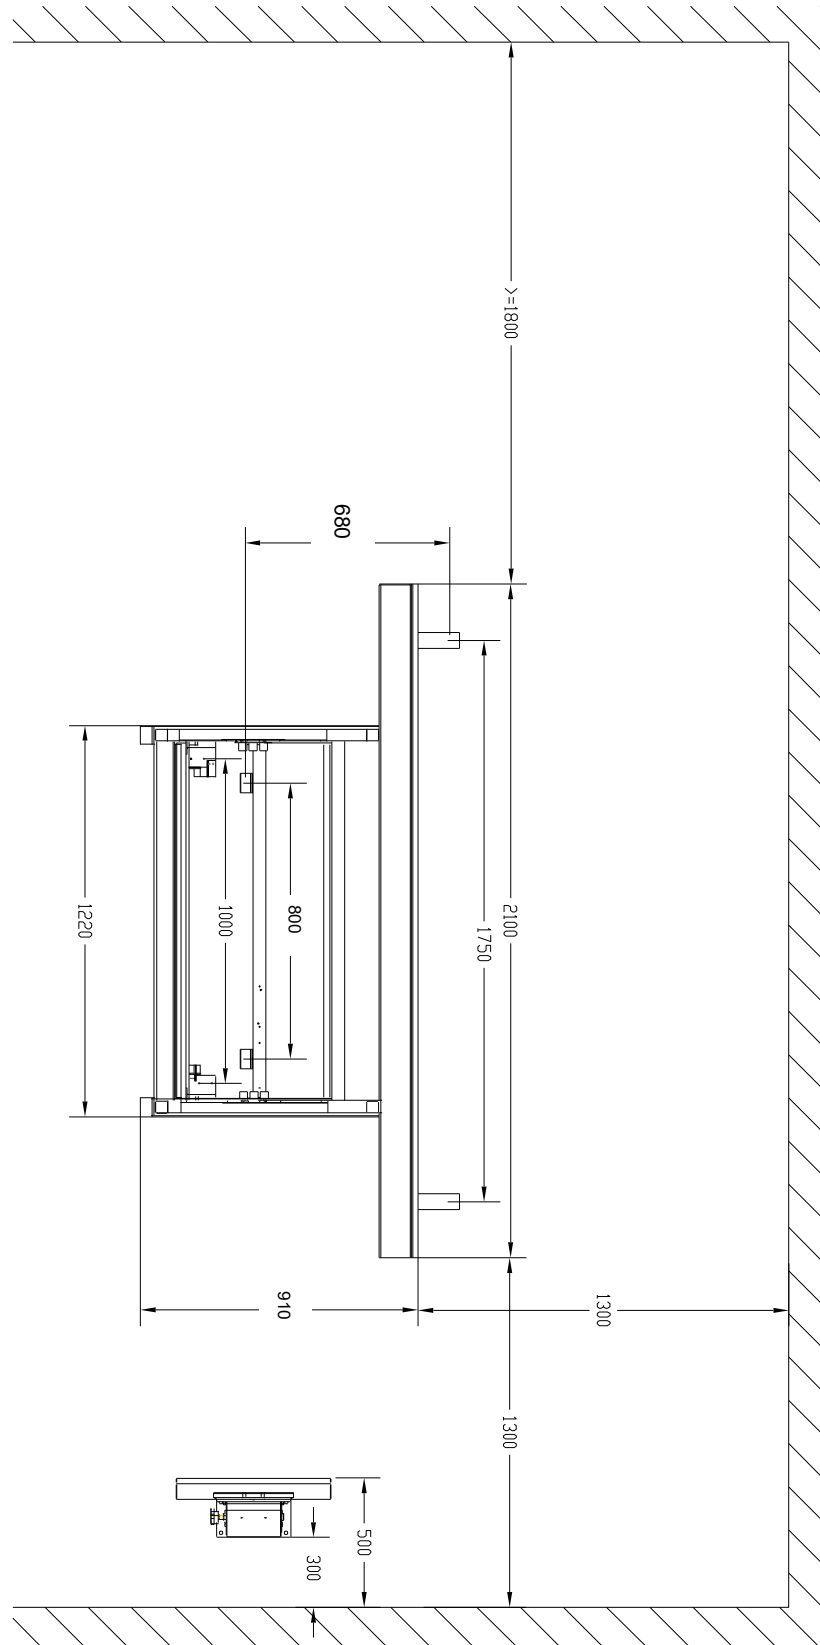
Floor Mounting - Table Assembly (Standard)
